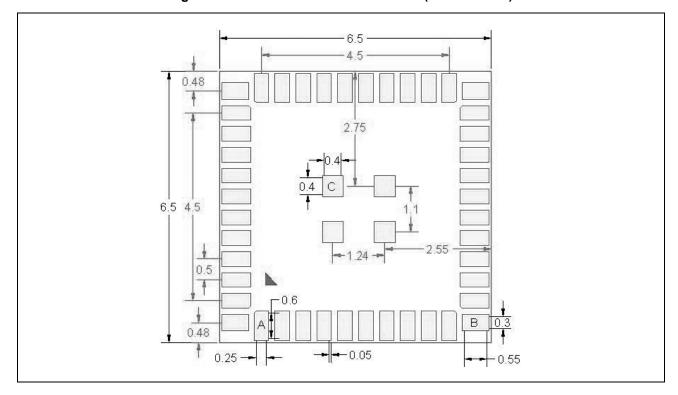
BCM20737S Pin Dimensions (Bottom View)
